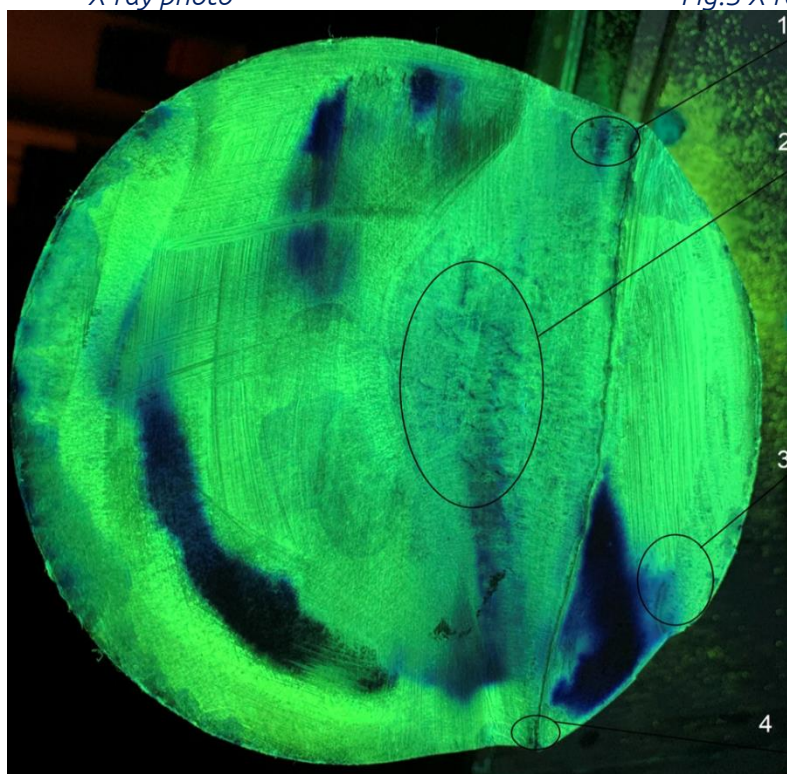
Analysis with penetrating fluids of workpiece 1.a
